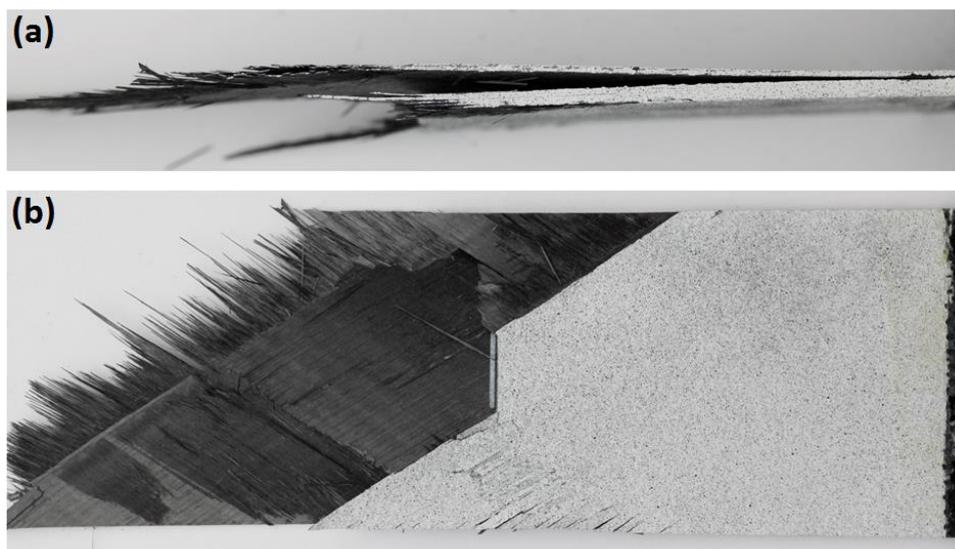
(a) Side view and (b) front view of a ± 35 specimen with a 75% depth notch after failure
